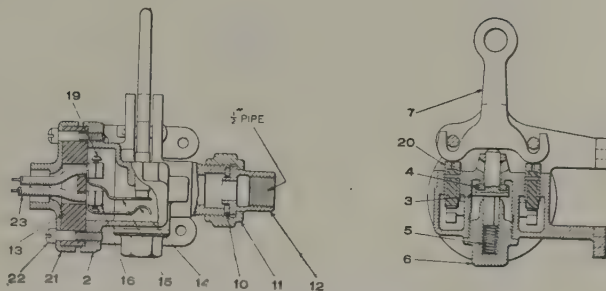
Electro-Pneumatic Car Discharge Valve.
